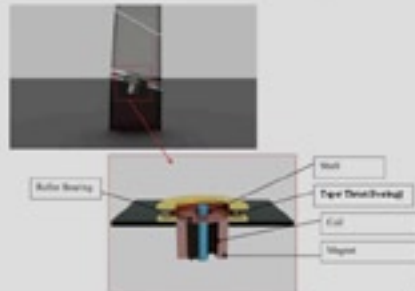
Details of Direct Drive Mechanism in 3D CAD software
